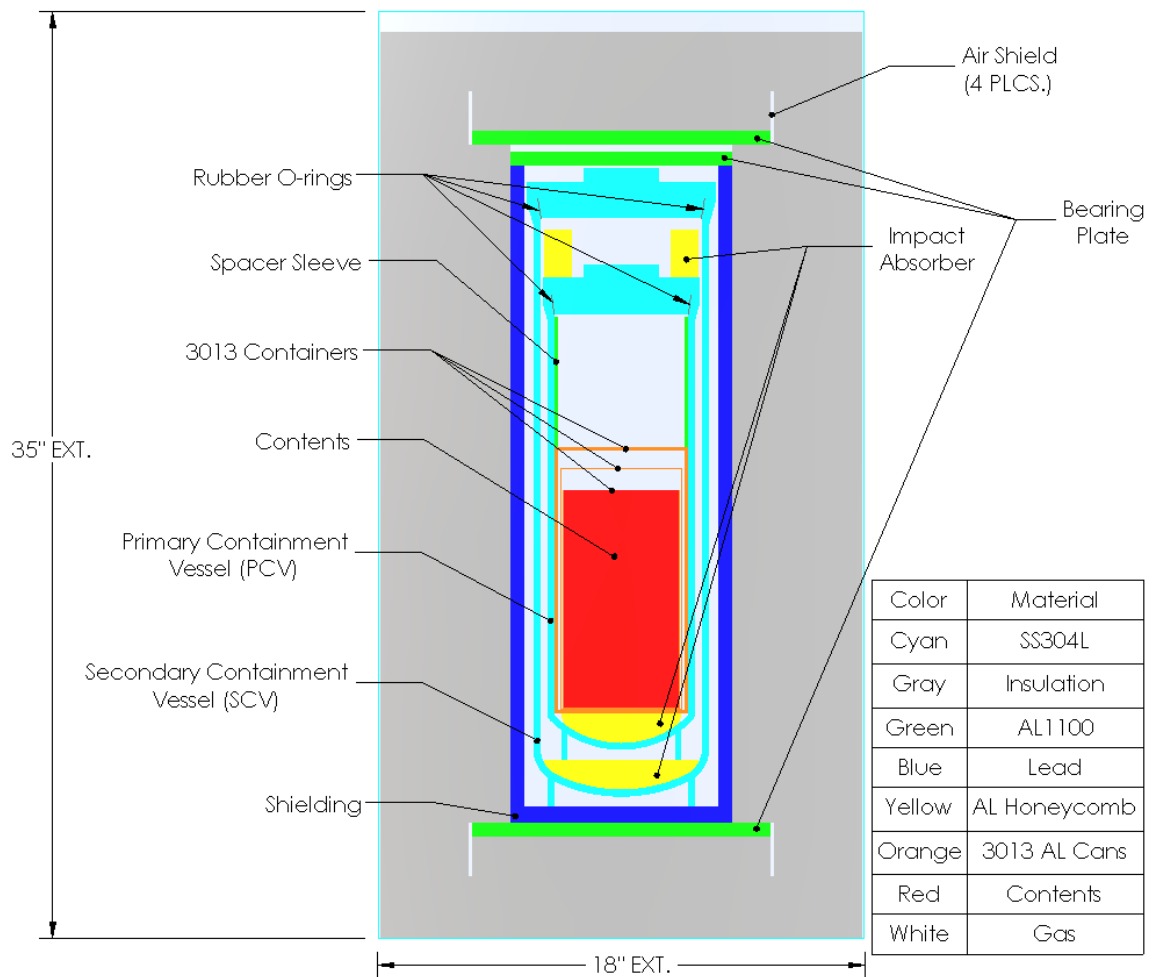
A cross-section of the axisymmetric 9975 package shows its components, dimensions, and materials [2].
